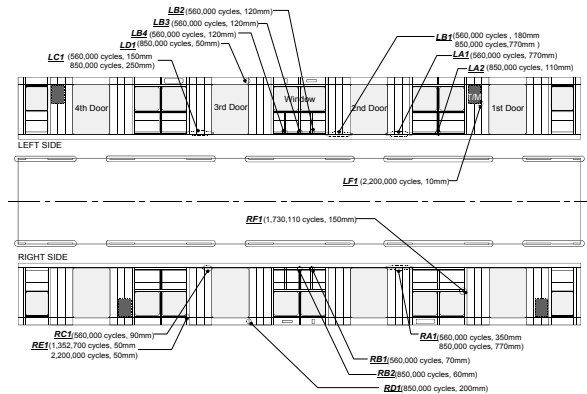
Fatigue cracks occurred in the car-body
